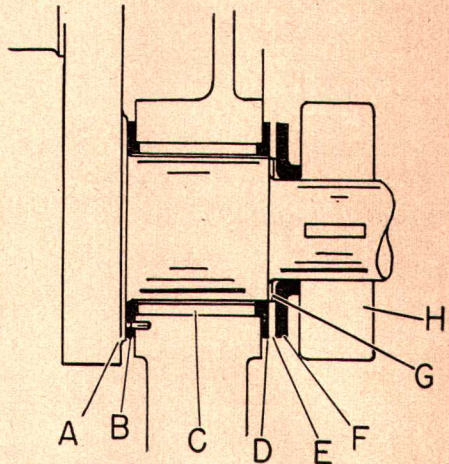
Schematic Layout of Crankshaft with Adjustable End Play
